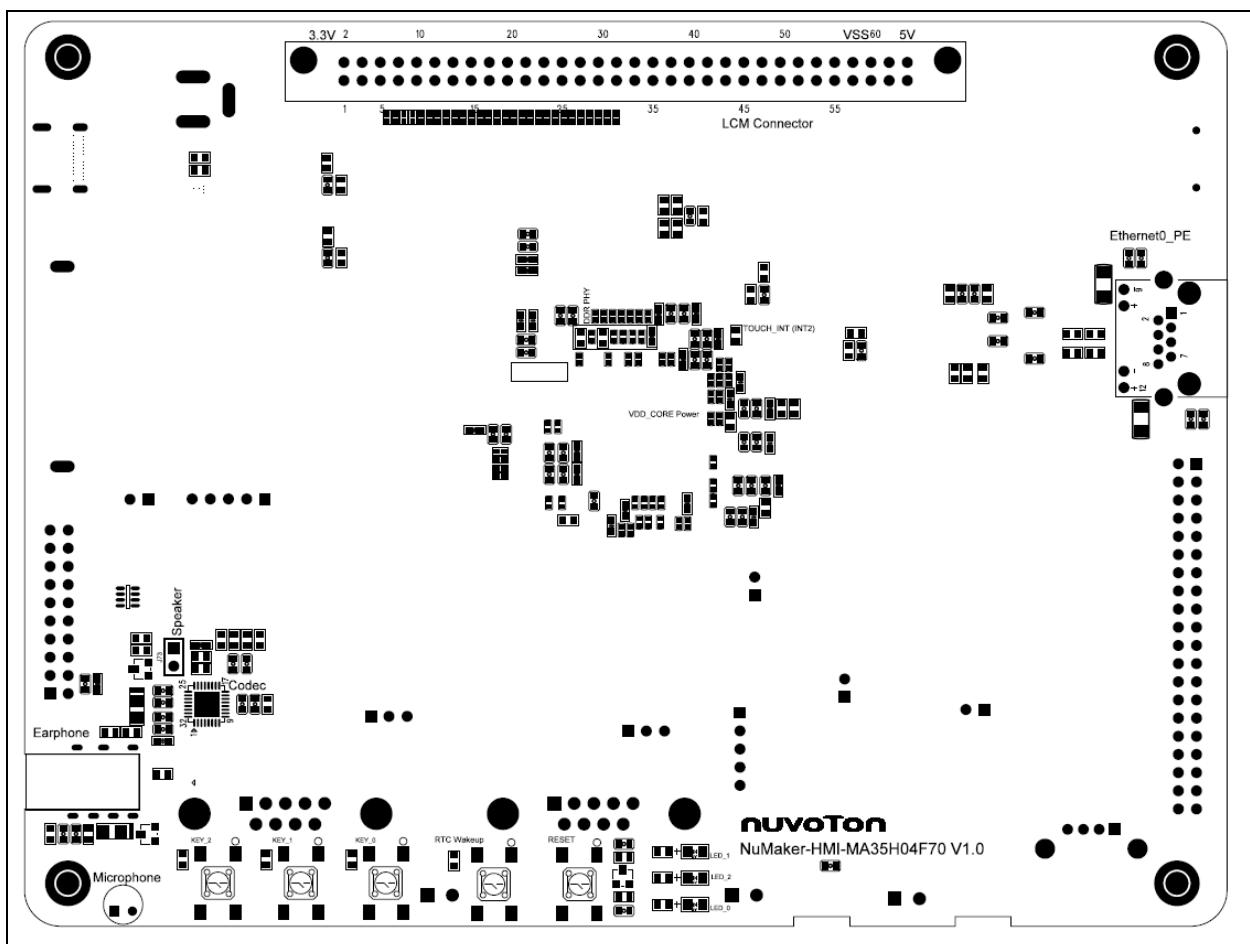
Rear PCB Placement of NuMaker-HMI-MA35H070 Board
